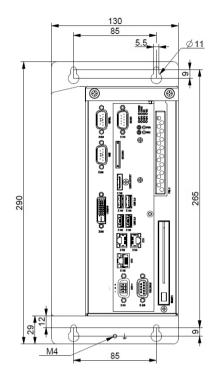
Dimensions: Front side with keyholes (KBox C-101-1)
